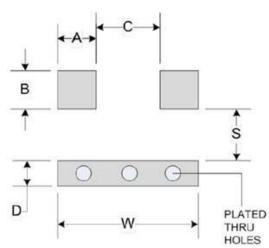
2D Drawing TS06XXF Mechanical Footprint
